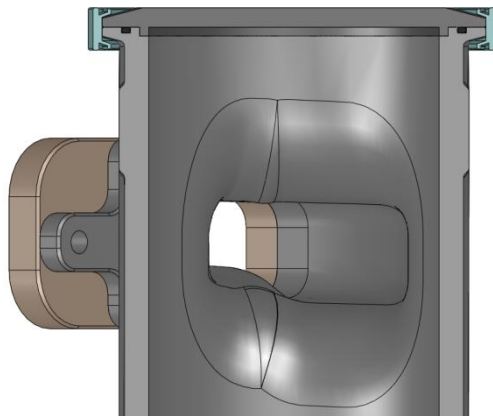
Cross section of the end of the Budget Viper plenum
